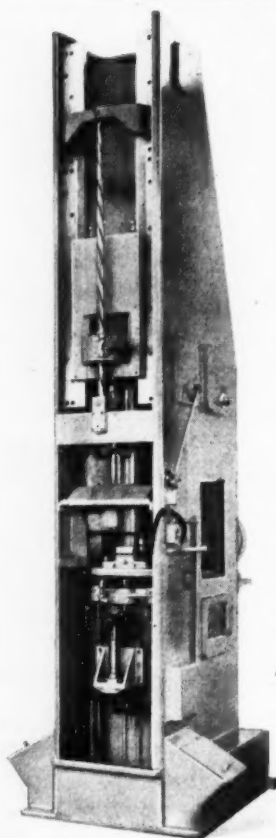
Machine that Broaches Spiral Gears and Pump Bodies
